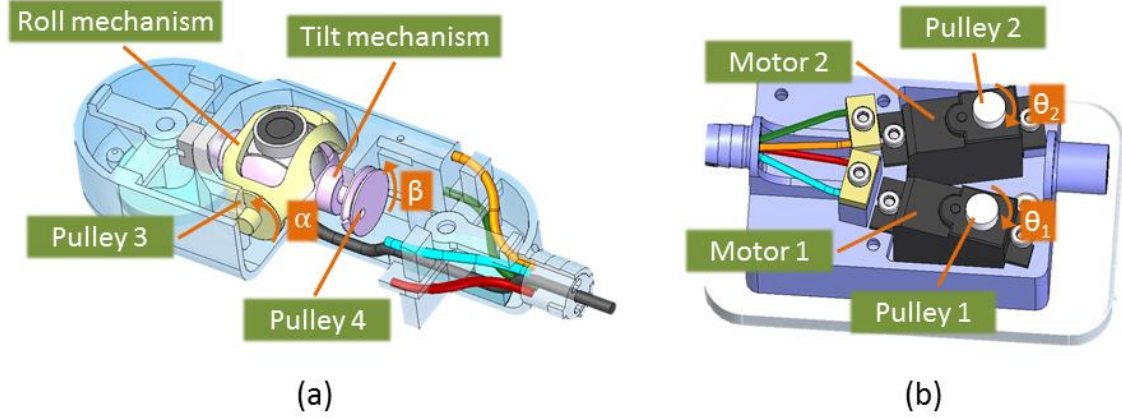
Cable-driven actuation system: (a) driven side; and (b) driver side.
